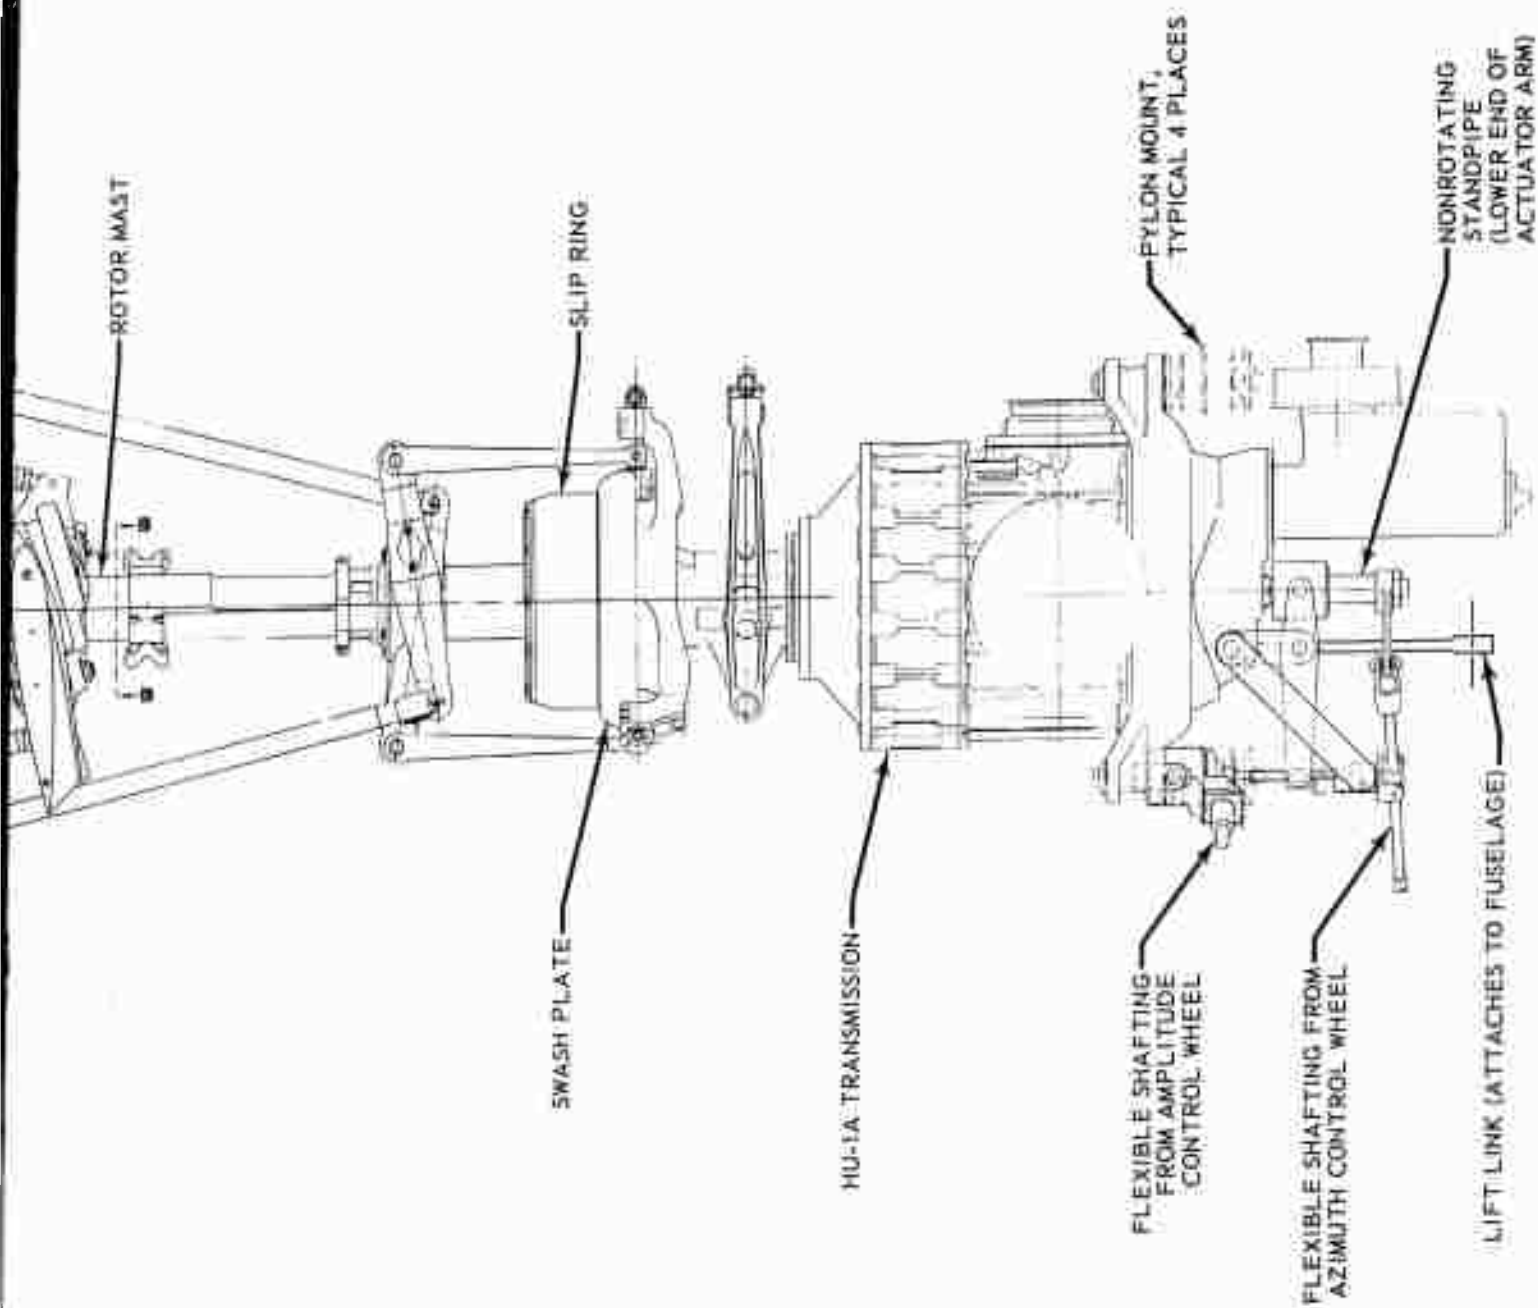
DRAWING OF EXPERIMENTAL PYLON ASSEMBLY
